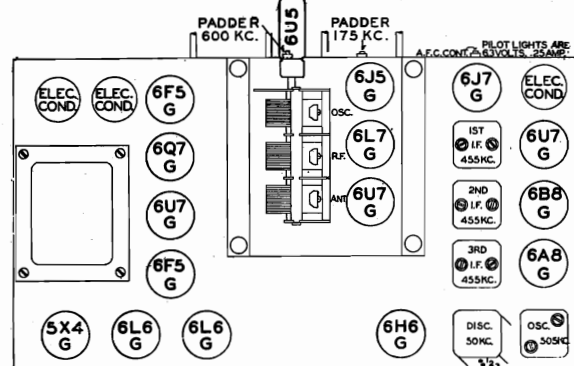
B CHASSIS LAYOUT (TOP VIEW)
